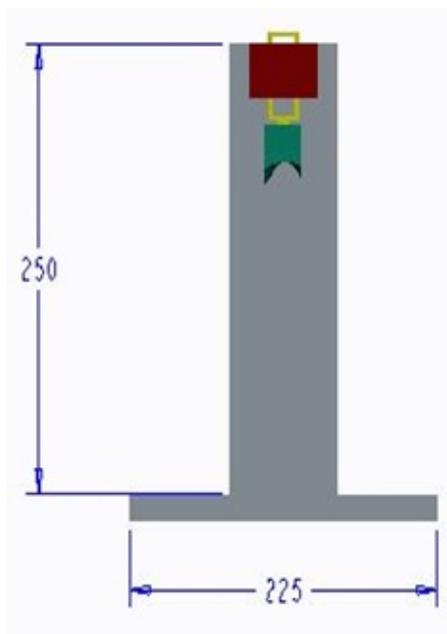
Overall Dimensions of Stereotactic Frame
